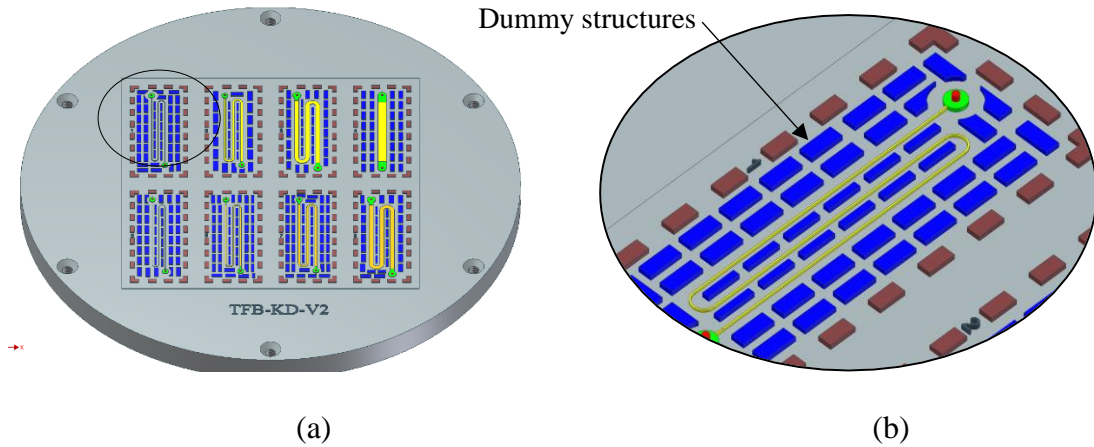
(a) Model of mold insert Version 2 (b) Detailed view of channel 1
